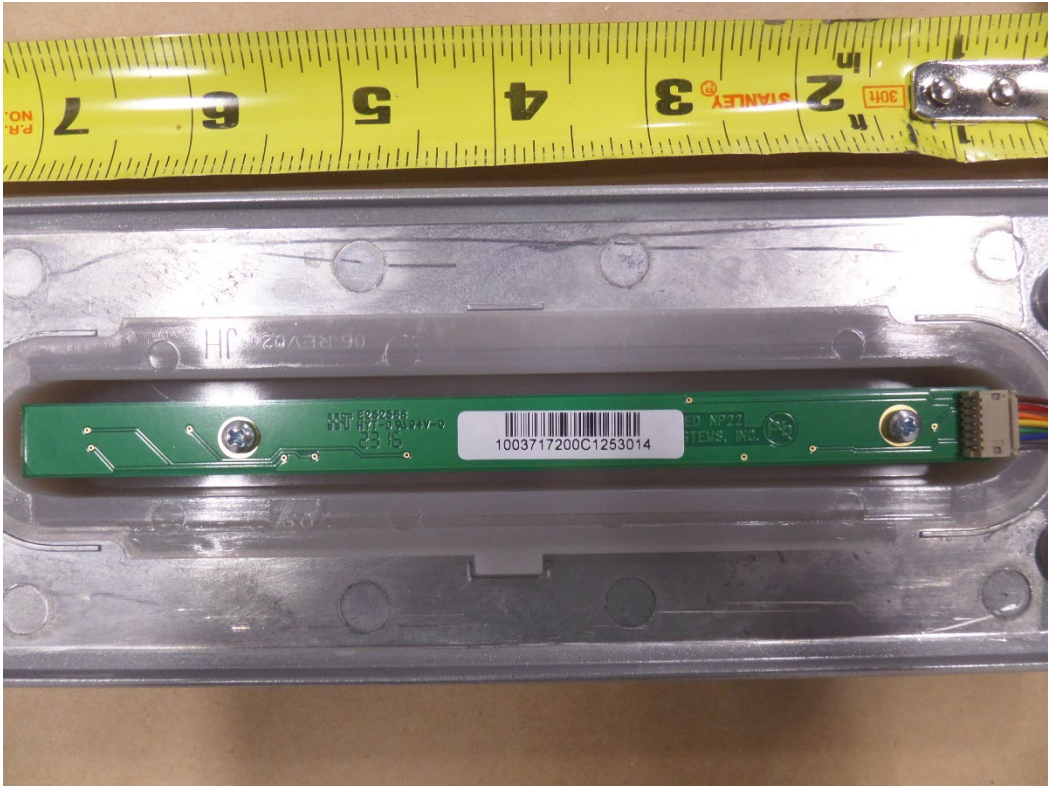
NP22 PRI/PAB/SAB RF ANT FRAME LED BOARD BOTTOM SIDE
